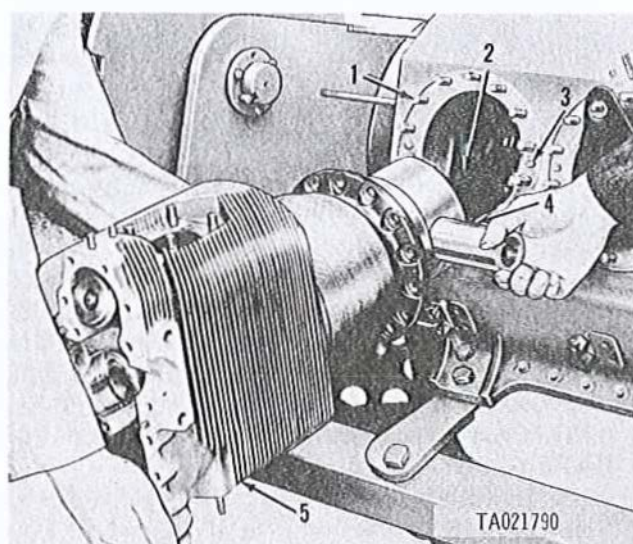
Installing piston in cylinder assembly using compressor and gage.
